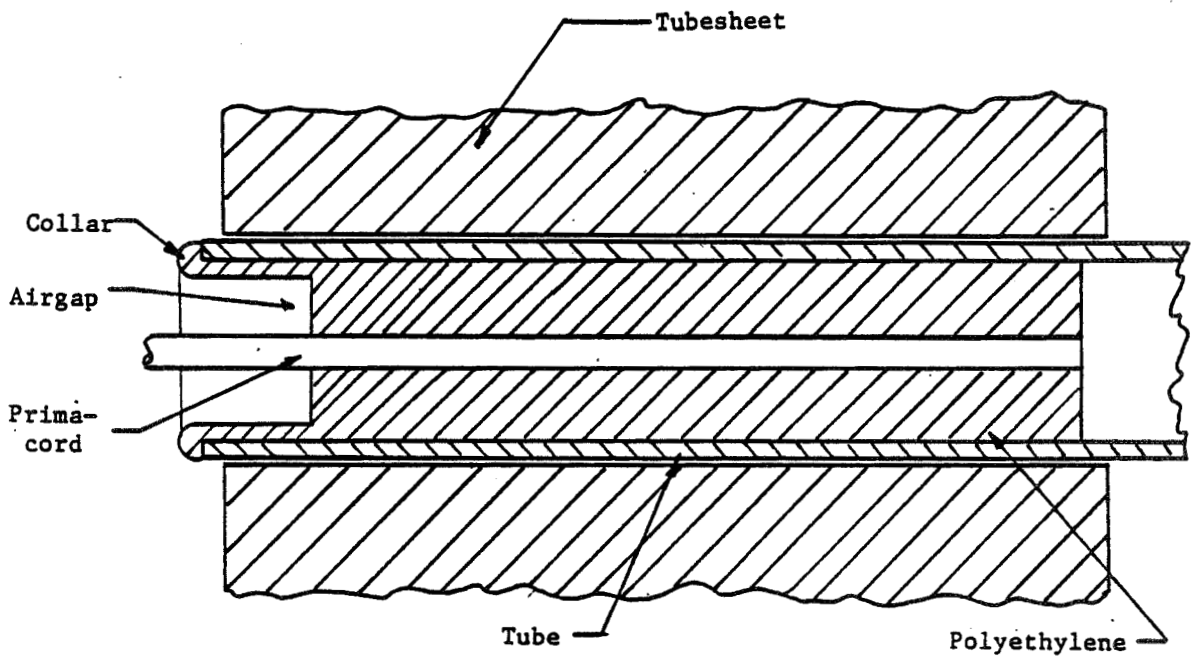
Explosive insert positioned in a tube and tubesheet assembly.
